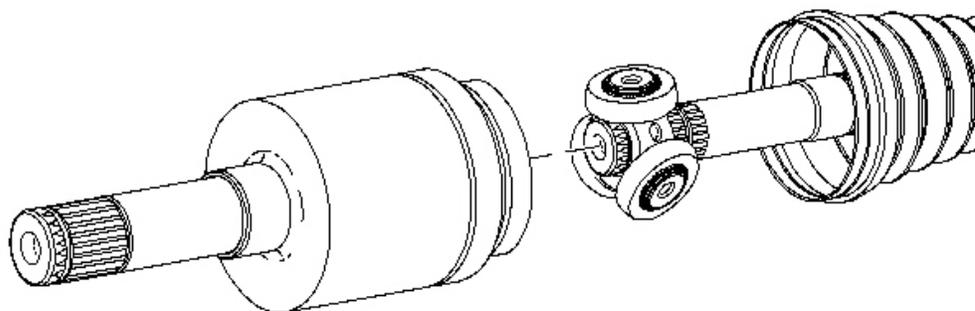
View Of Front Wheel Drive Shaft Inner Joint
